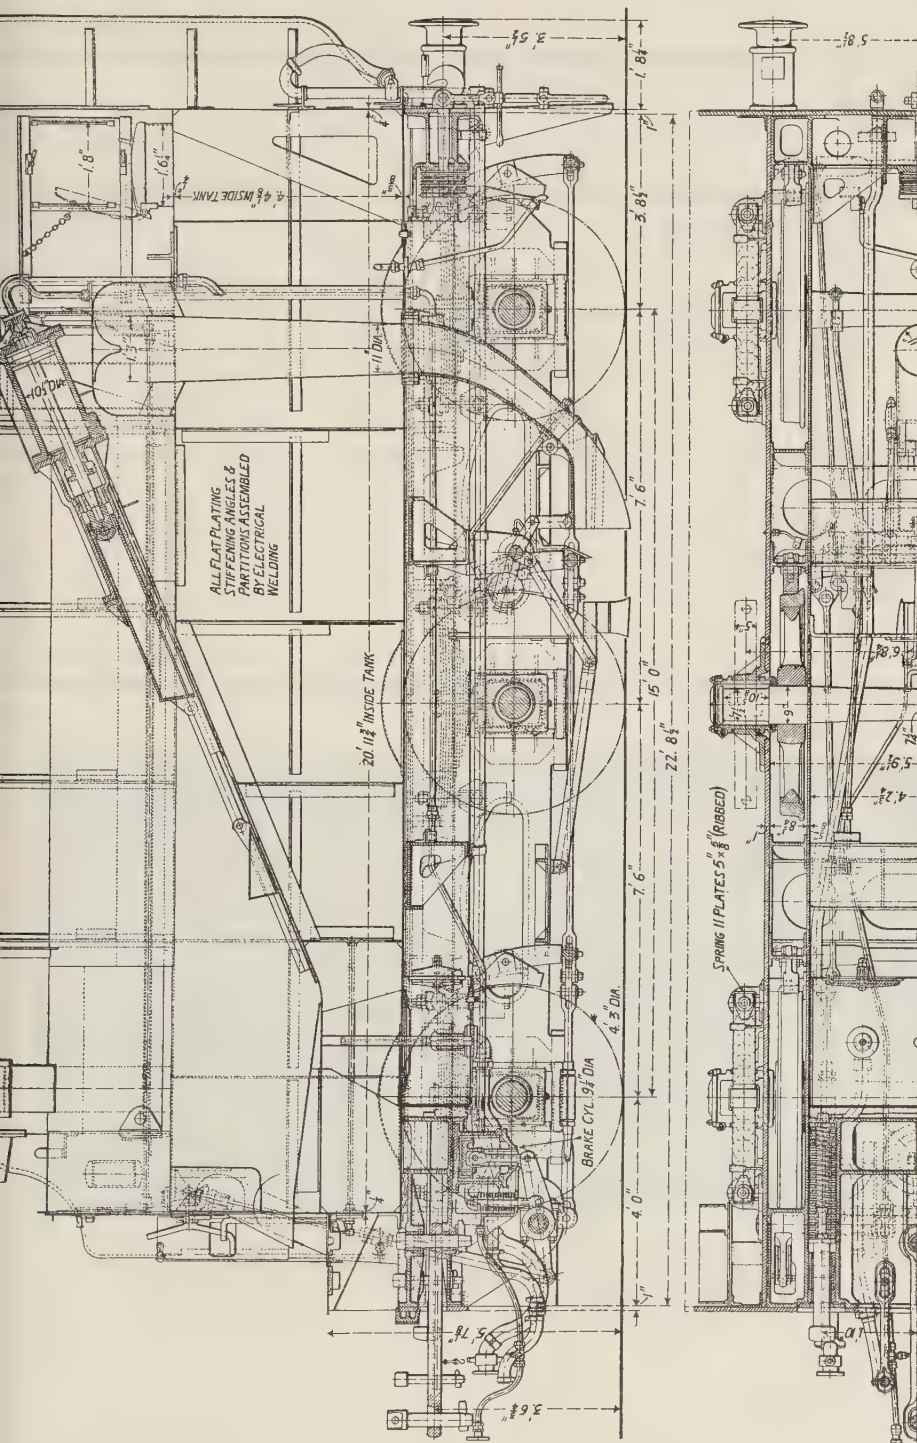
Detail of welded tender showing coal pusher and water pick-up apparatus.
